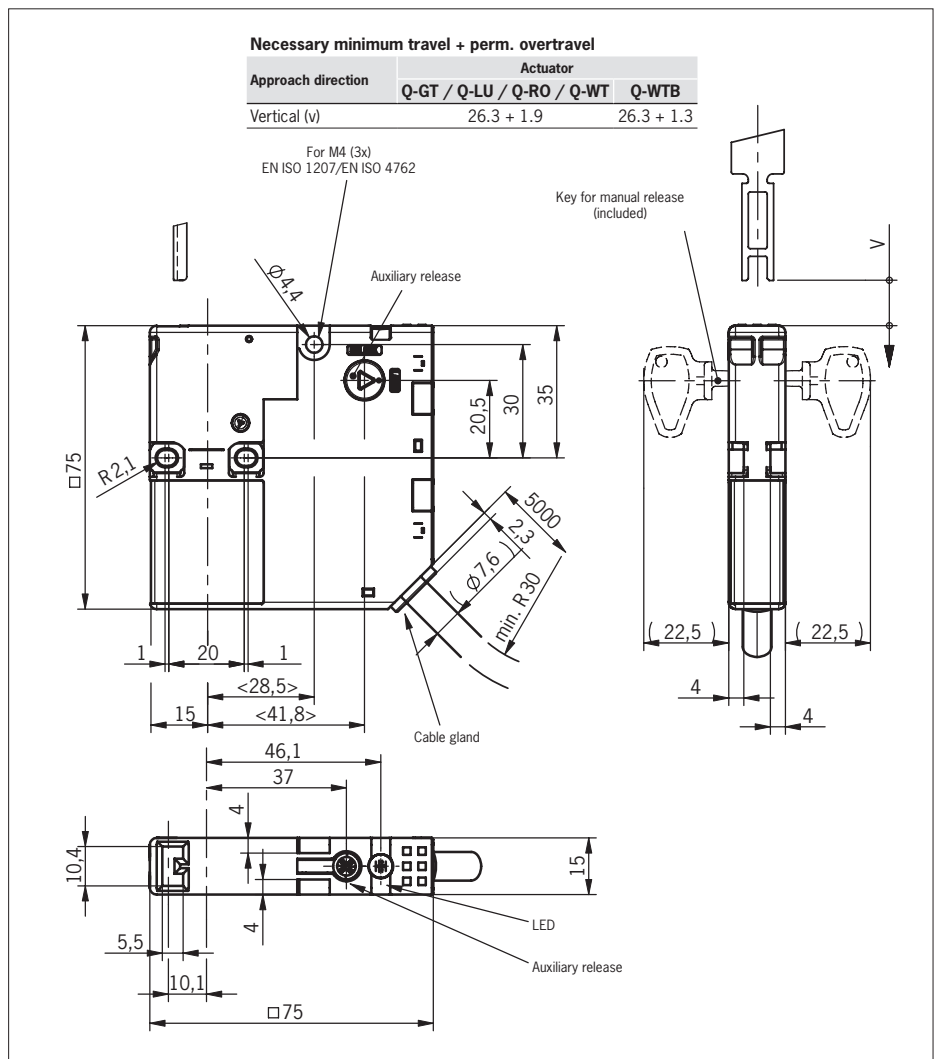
Dimension drawing for TQ...; minimum travel and overtravel
